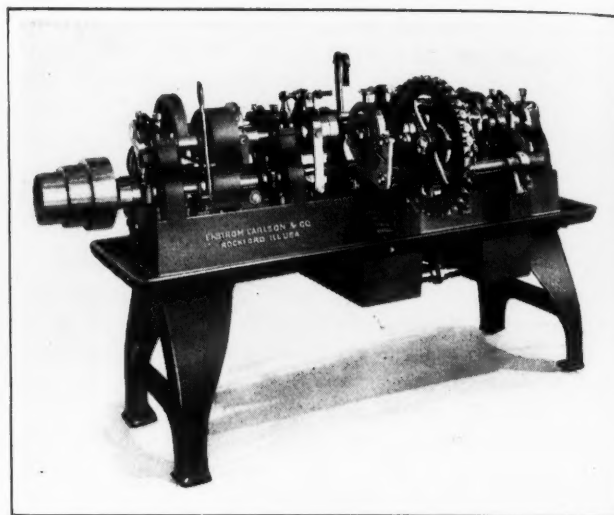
Automatic Threading Machine Built by Ekstrom, Carlson & Co.
